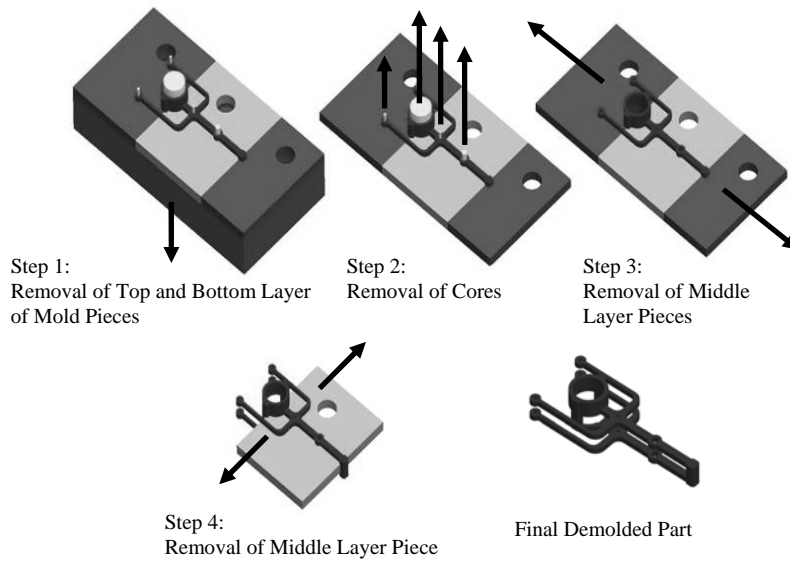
Parting surface design for in-mold fabrication of the body-frame.
